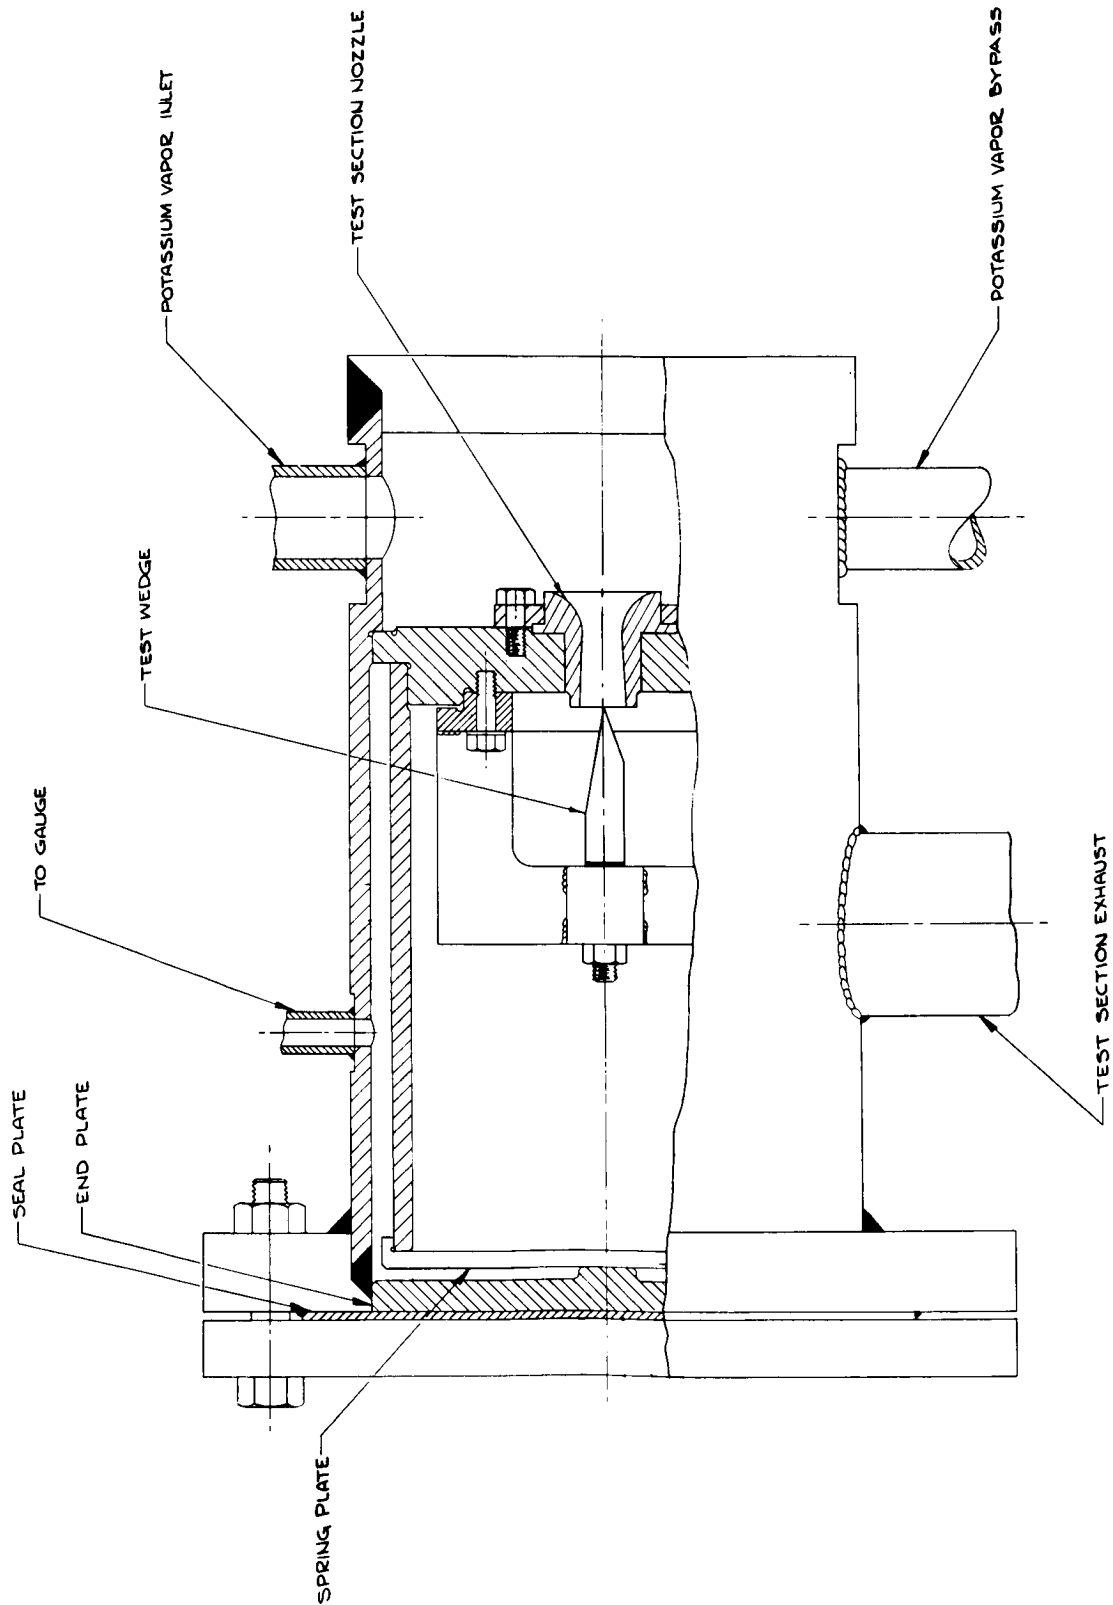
Test section layout drawing with mounted nozzle-wedge specimen
